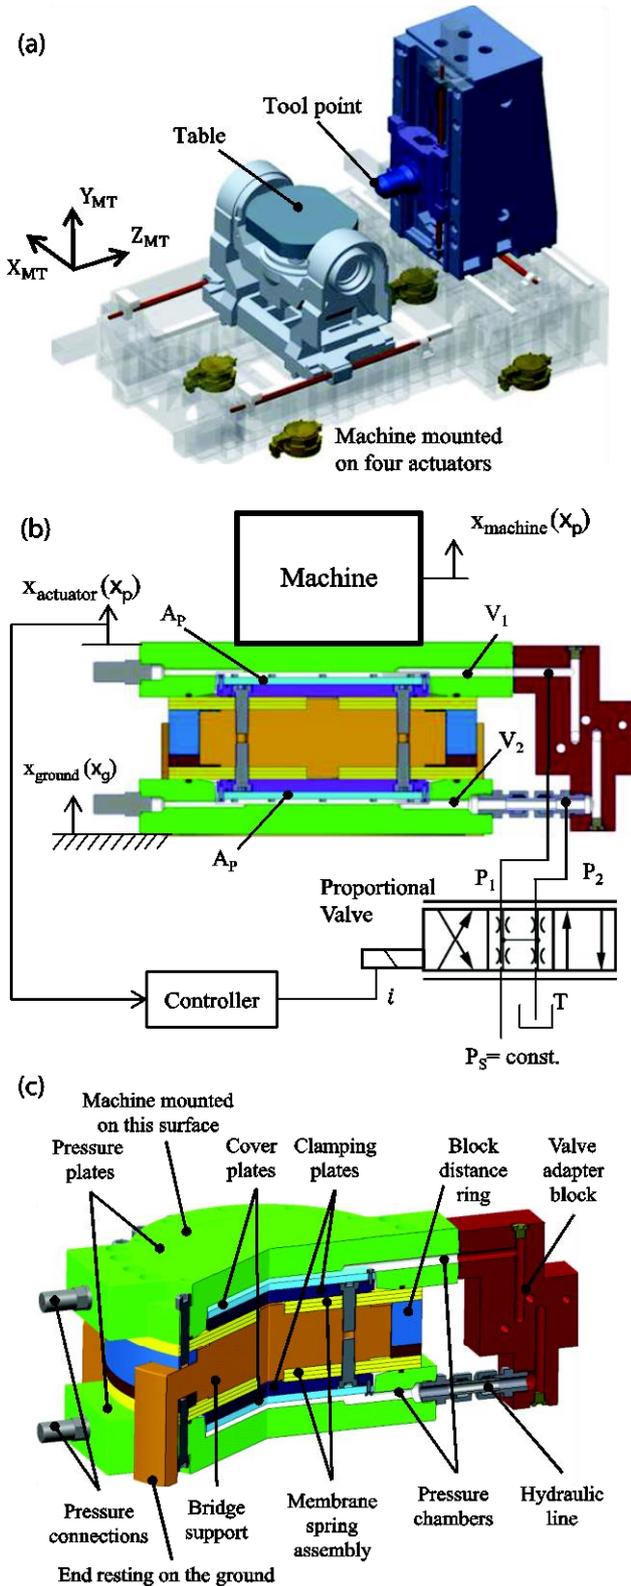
(a) Schematic representation of a machine mounted on four actuators; (b) Schematic of valve controlled electro-hydraulic system; (c) Sectional view of the construction of the actuator. Figure adapted and modified from [5] Nomenclature in Fig. 1(b) is described in Section 2.
